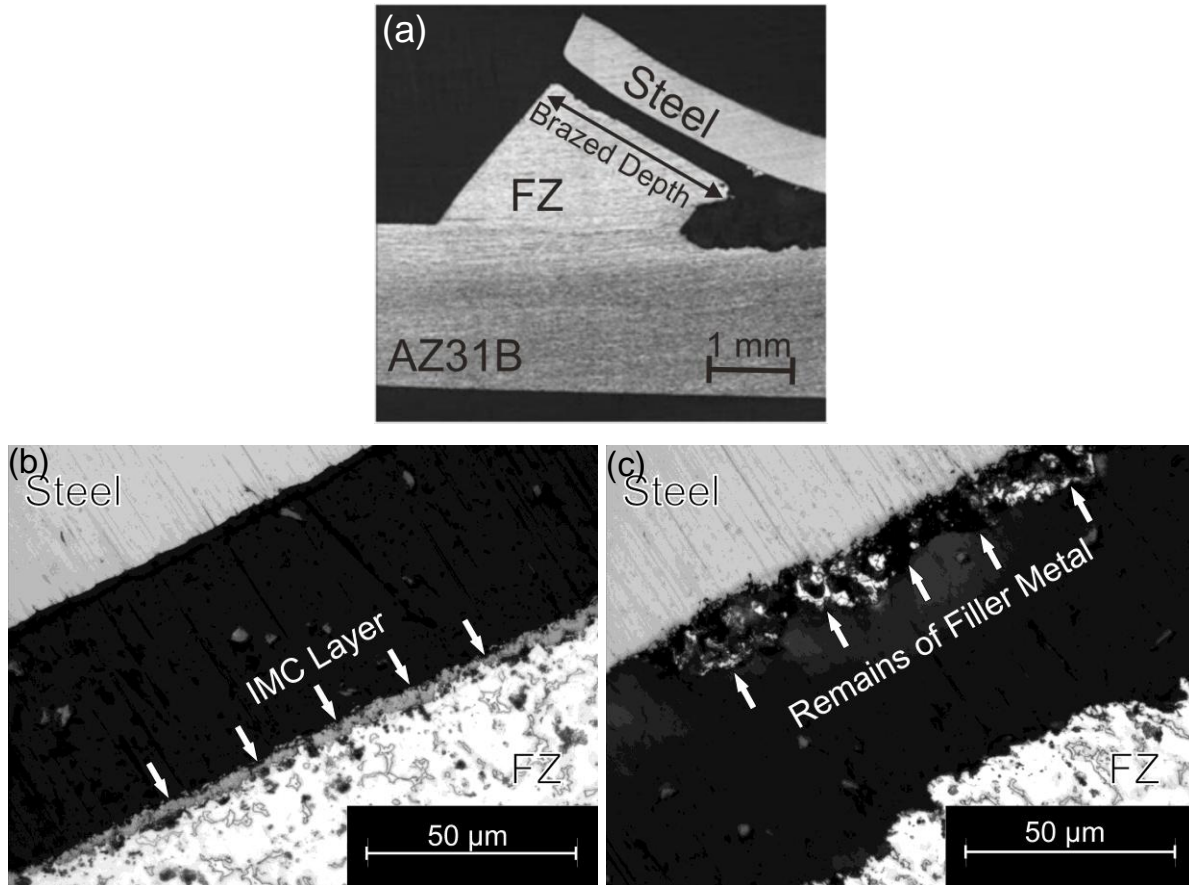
Fracture location of the tensile shear test specimen, (a) fractured specimen, (b) crack propagation in bottom side of the joint, and (c) crack propagation in upper side of the joint.
